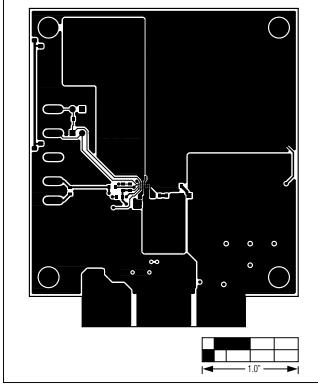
MAX15118 EV Kit PCB Layout—Component Side
